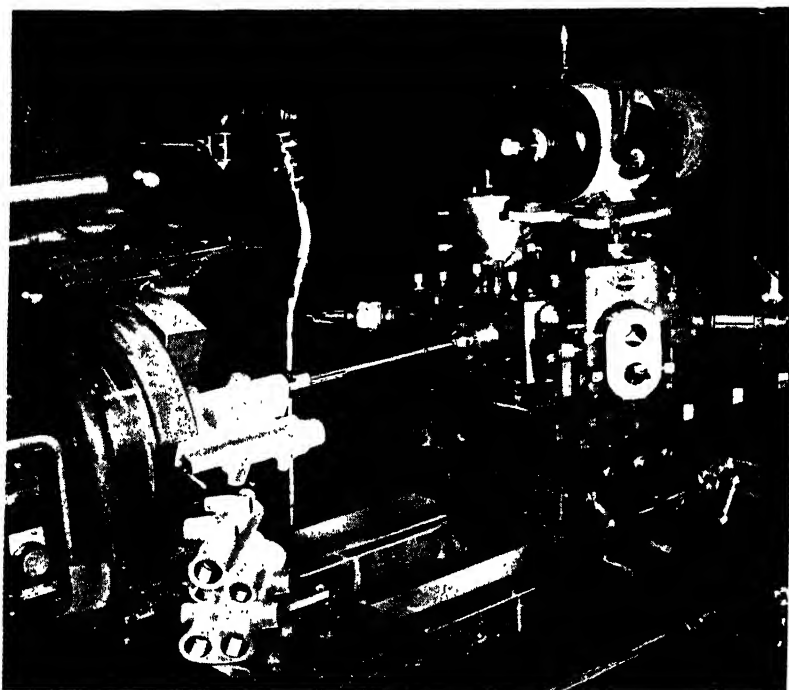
Turret Lathe Tooled up for Machining Hydraulic Selector Valve Castings
